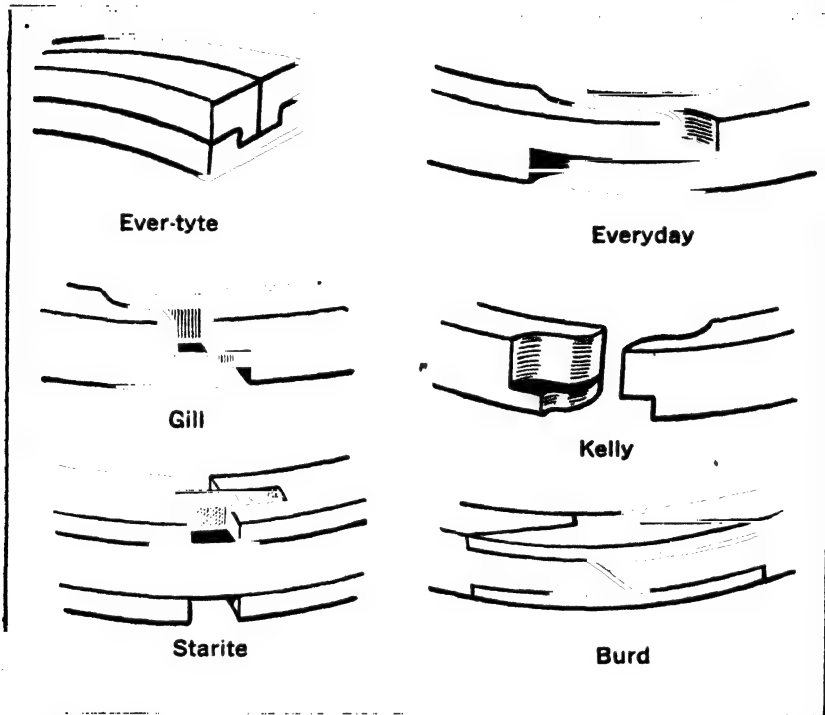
Special Ring Joints Intended to Provide Against Leakage at the Gap. Rings of this Type Have Been Used in Automobile Engines Successfully.
